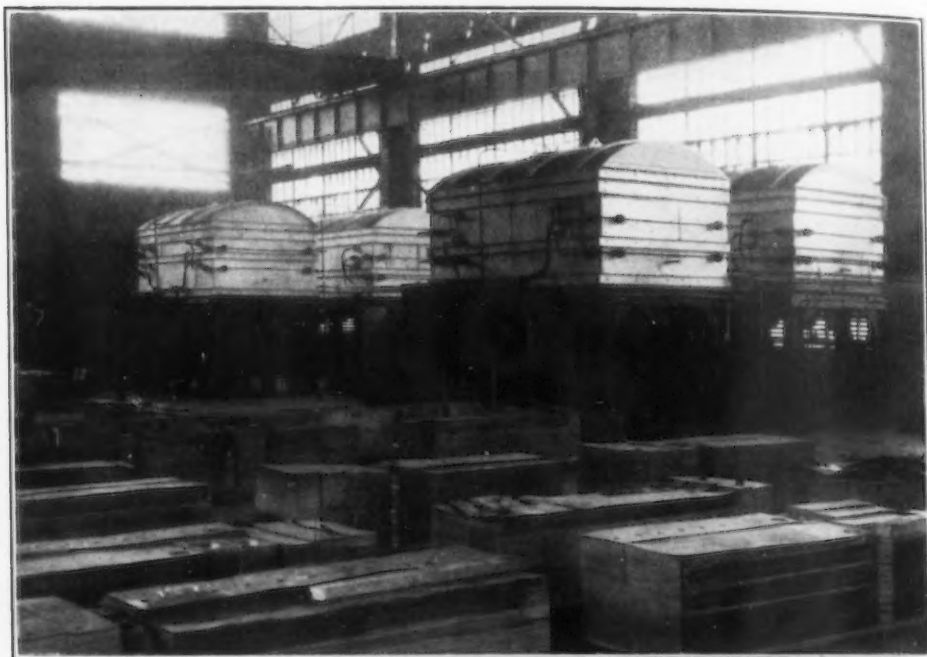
Group of Elevator-type Furnaces for Annealing Sheet Steel for Electrical Machines.
